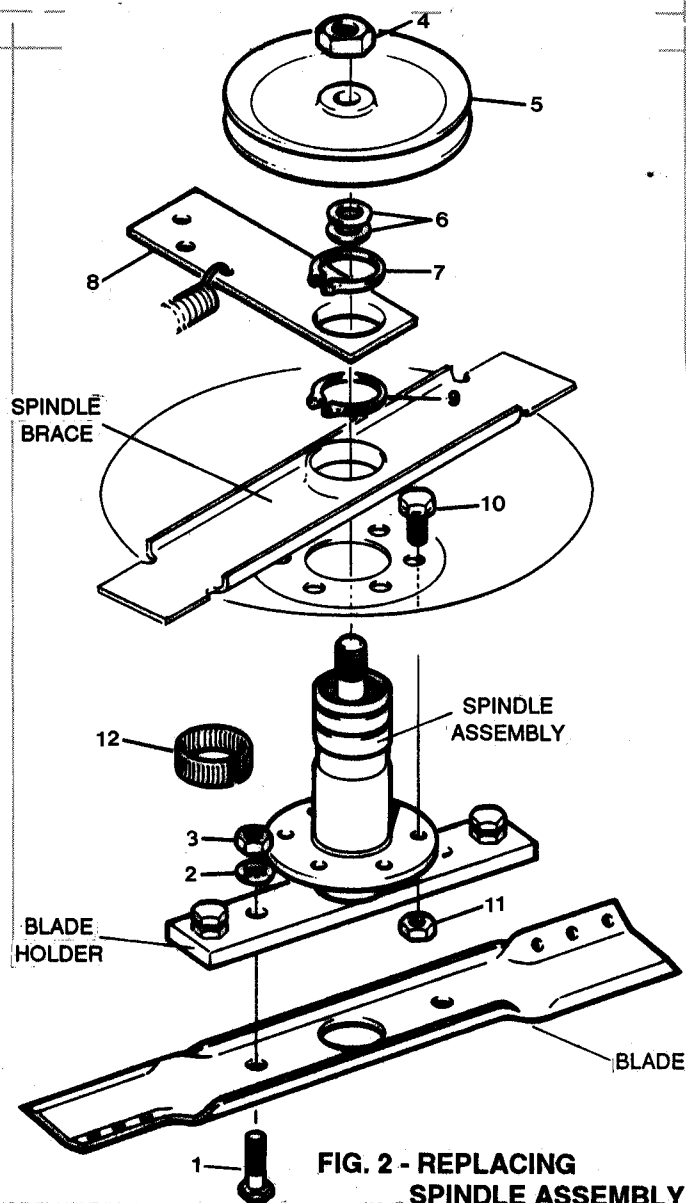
REPLACING SPINDLE ASSEMBLY
